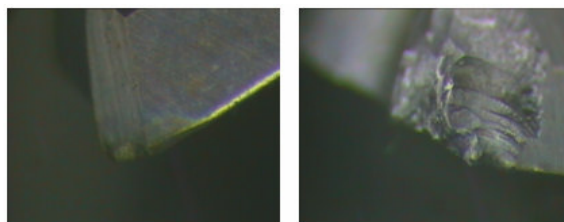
Milling cutter before and after machining of acrylic (Souza, 2008b).
